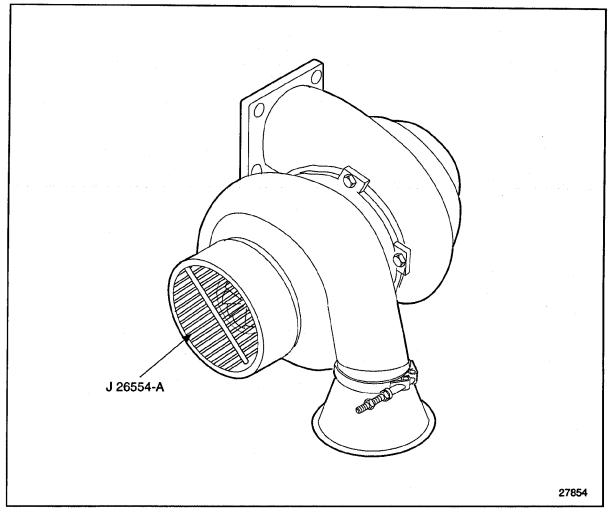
Turbocharger Compressor Inlet Shield (Series 60G Engine)
